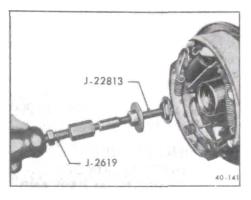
Axle Shaft Bearing and Seal Remover
